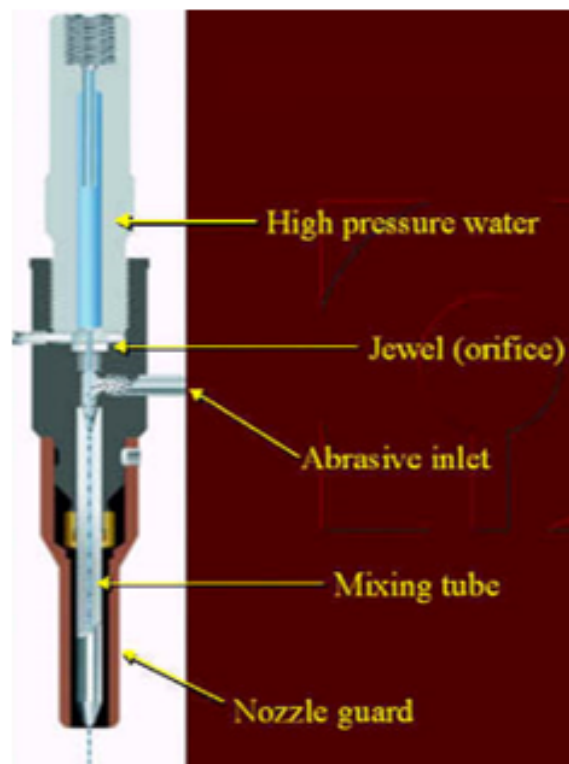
A standard waterjet cutting machine with the labeled components shown [16]
